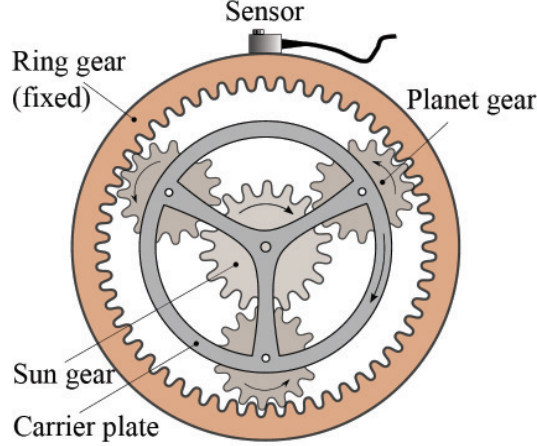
Measurement arrangement on a single-stage planetary gearbox.
